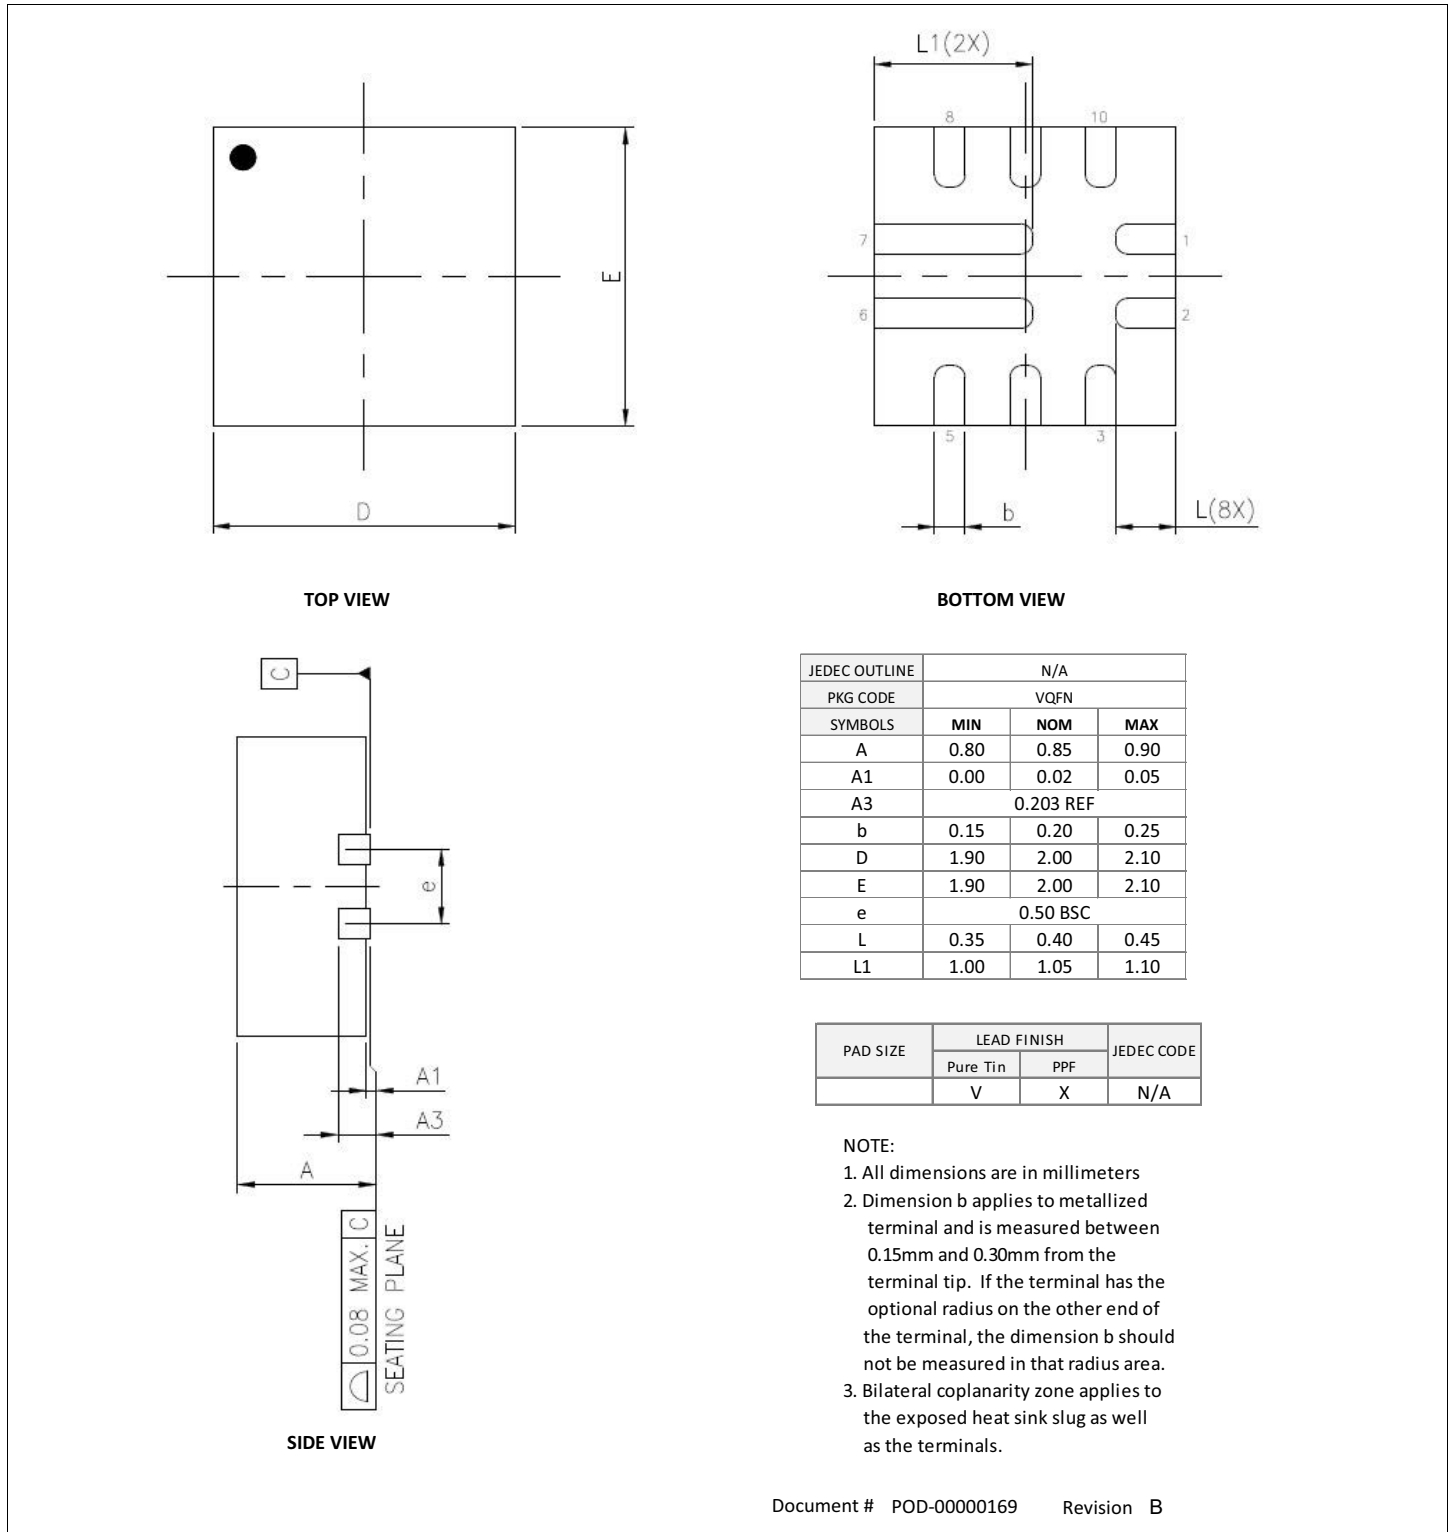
Mechanical Dimensions—2mm × 2mm QFN
